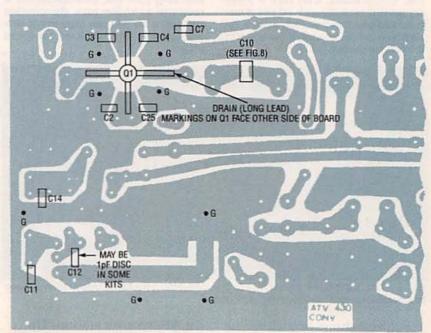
ALL CHIP CAPACITORS, C10 (see Fig. 8), and Q1 mount on the solder side of the board. The markings on Q1 face the component side of the board.
